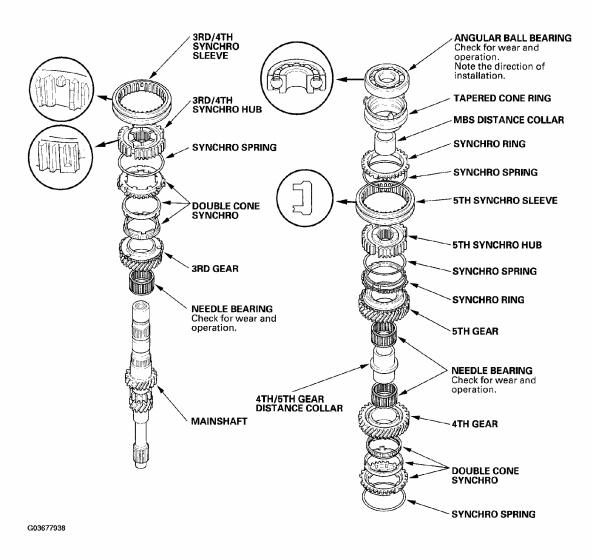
Exploded View Of Mainshaft Courtesy of AMERICAN HONDA MOTOR CO., INC.
